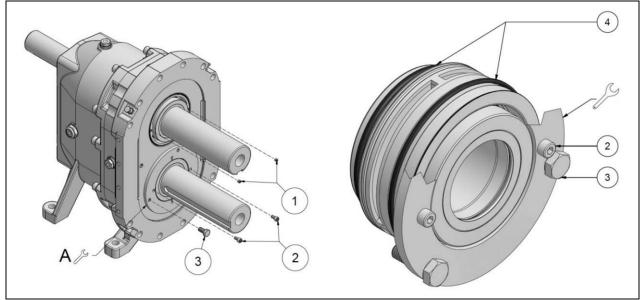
Disassembly/installation of the cartridge mechanical seal (pos. A, 2 and 3 are included in tool with part no. WKZ0455)
